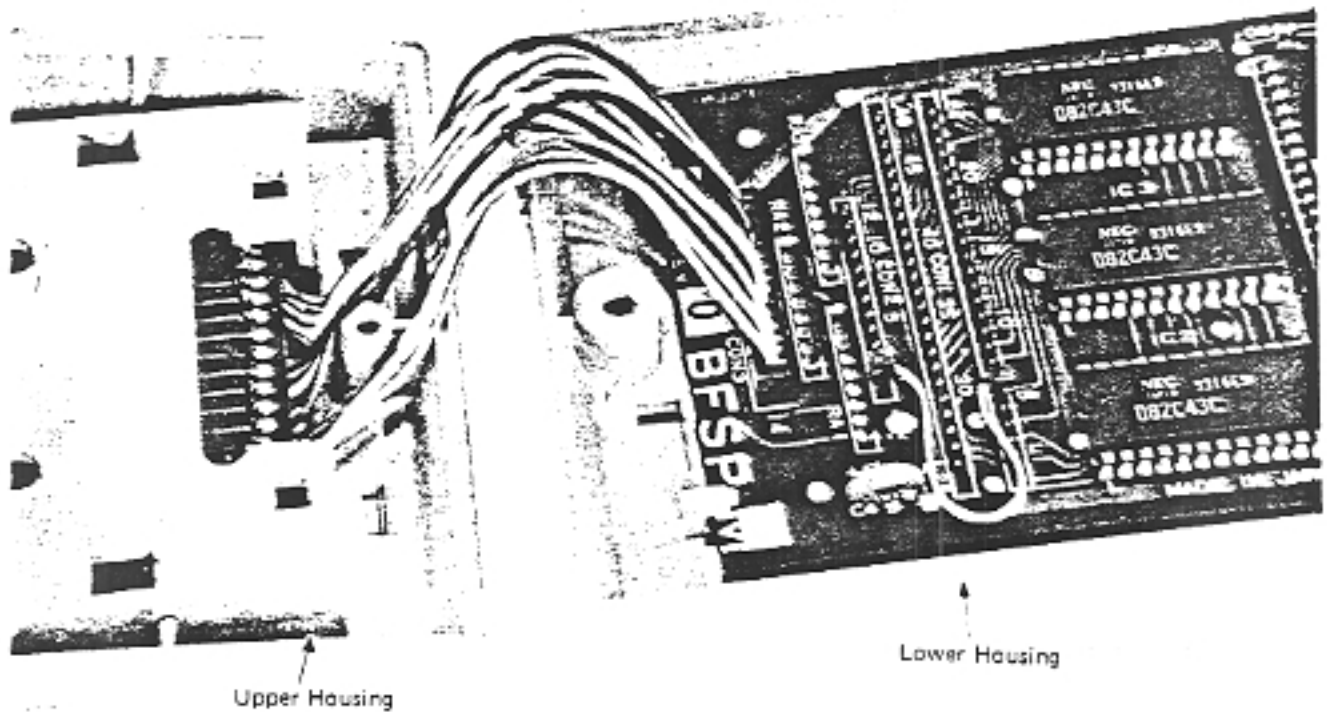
(1).E Jumper Wire Assemblies Installed (Example)
